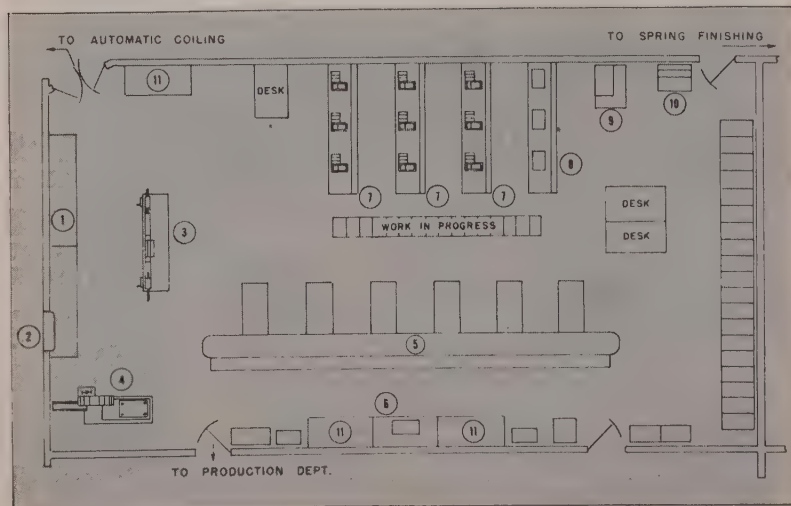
Layout of central inspection and quality control department: (1) First piece inspection bench, (2) receiving window, (3) Olsen spring testing machine, (4) Olsen tension, compression tester, (5) inspection island, (6) Magnaflux seam detection unit, (7) 100 per cent testing stations, (8) special testing, gaging and adjusting station, (9) 200-pound air-operated beam type spring tester, (10) spin tester for checking motor starting switch springs, (11) general utility inspection and test stations
